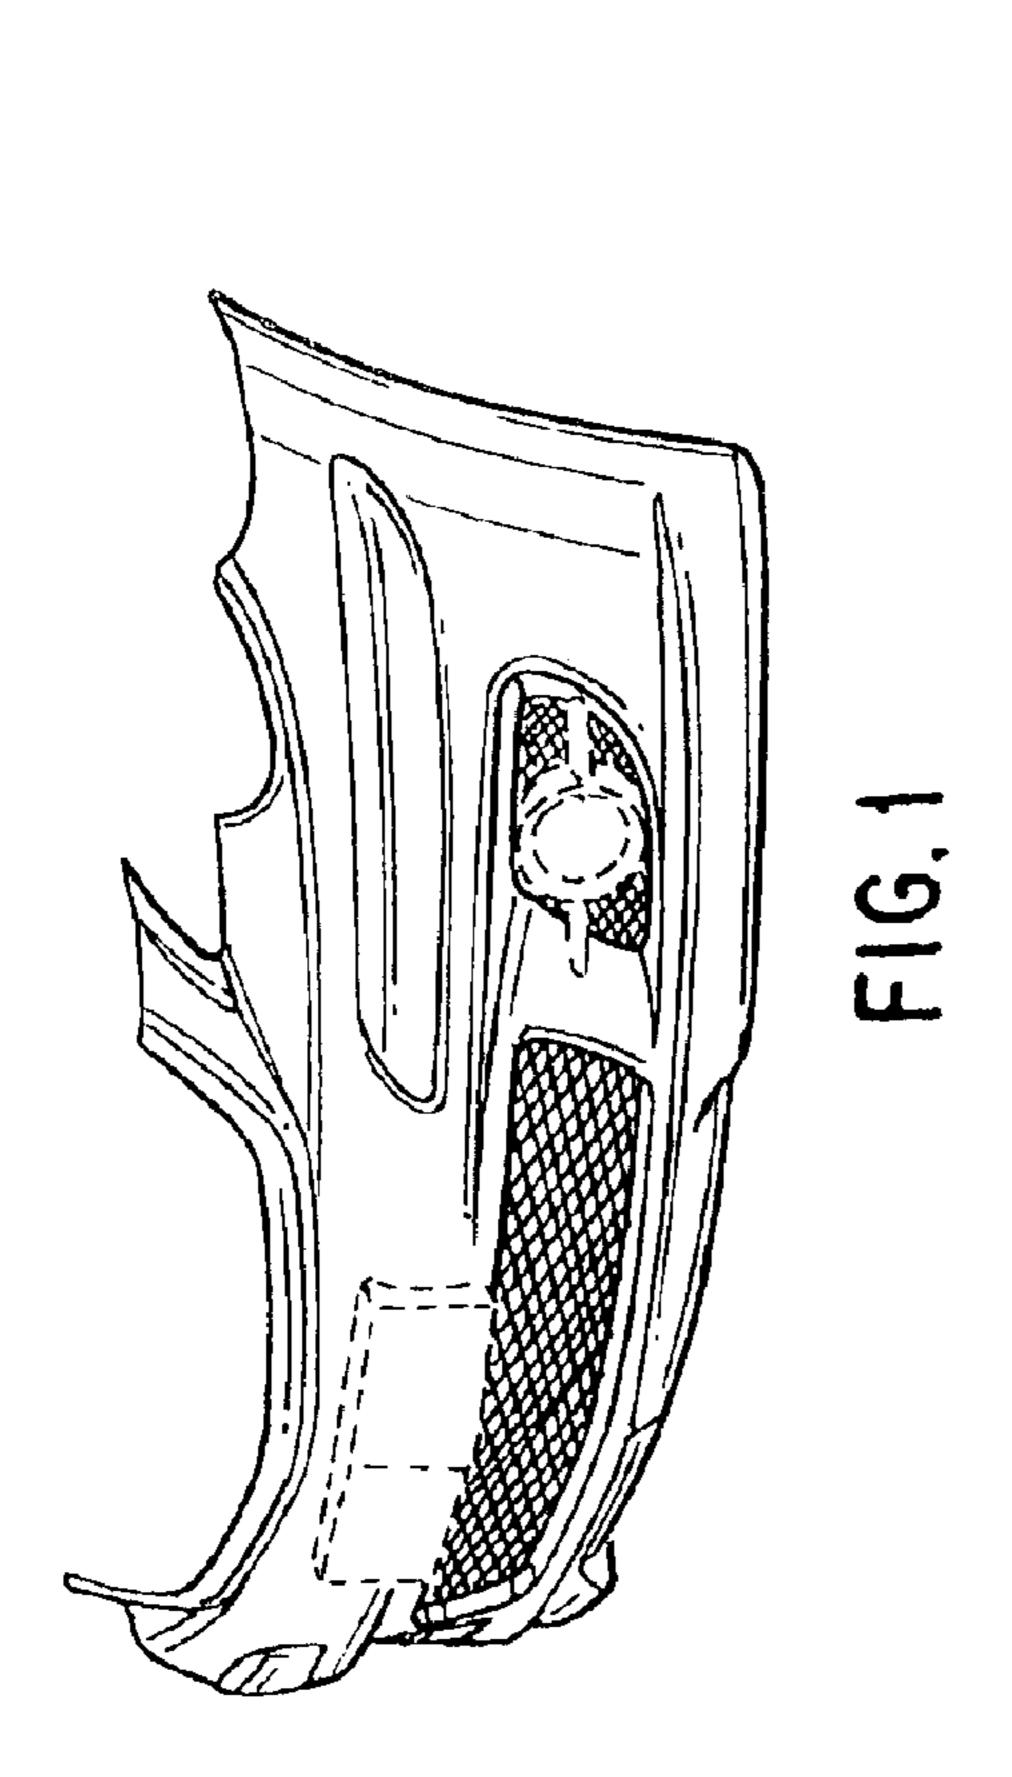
is a perspective view of a surface configuration of a front bumper for a vehicle, according to our novel design; FIG. 2 is a left side view of the surface configuration of a front bumper for a vehicle according to our novel design, the right side being mirror symmetrical; and,
